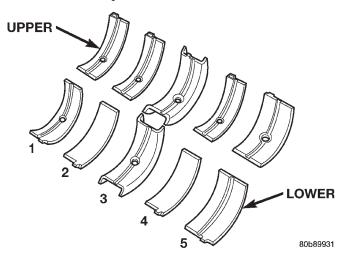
Main Bearing Identification REMOVAL AND INSTALLATION
